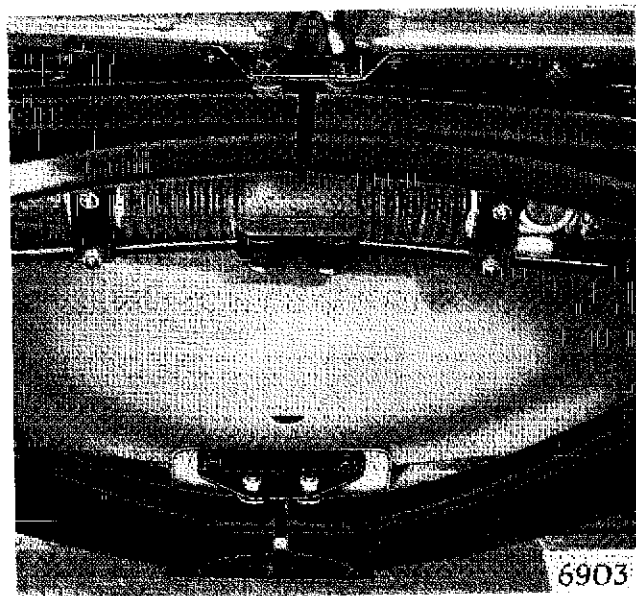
Under view showing inner ends of wishbones, pivot bolts and support brackets
